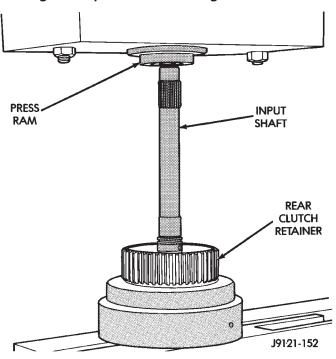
Pressing Input Shaft Into Rear Clutch Retainer
